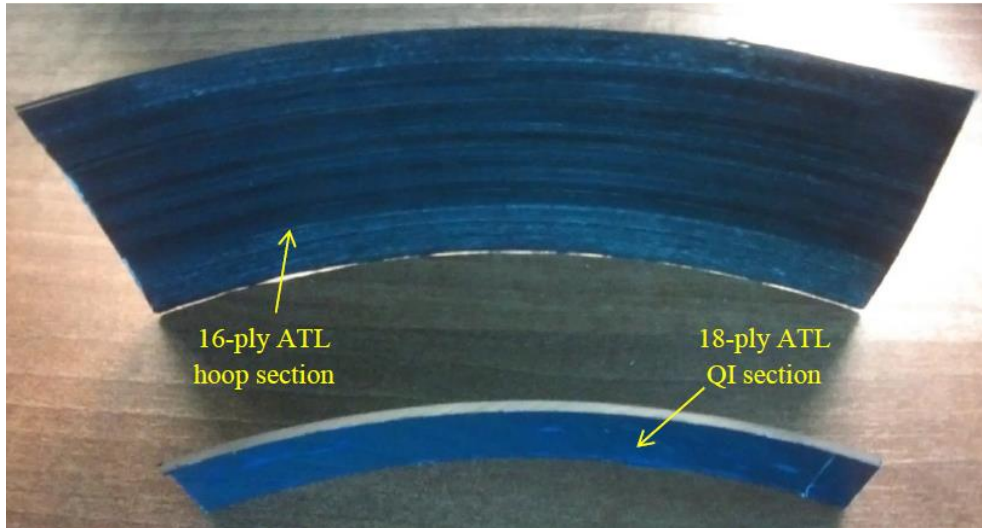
CF/PEEK cylindrical sections manufactured using the ATL robot.
